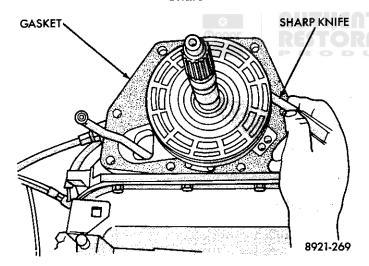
Trimming Overdrive Case Gasket CAUTION: Be sure the shoulder on the inside diameter of the bearing is facing forward.
